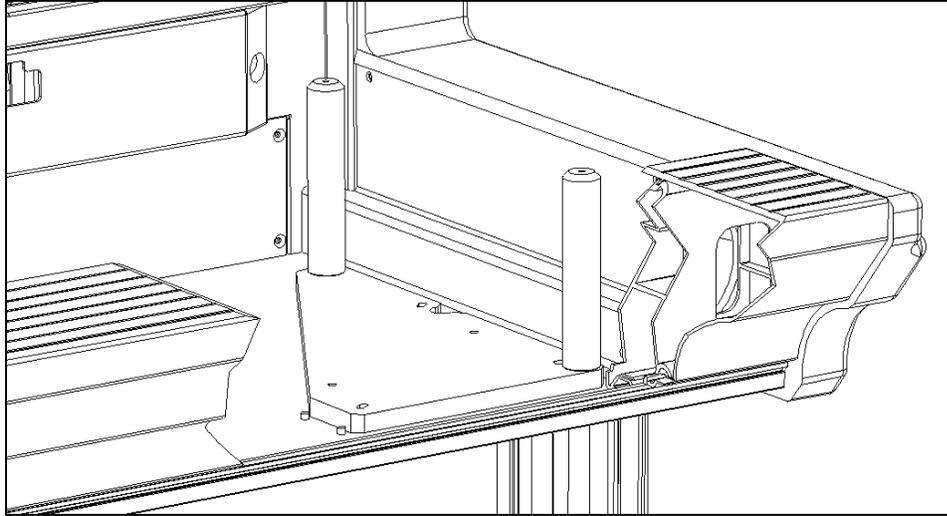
Positioning the Workspace Fixture - Right Side of DSX Workspace
